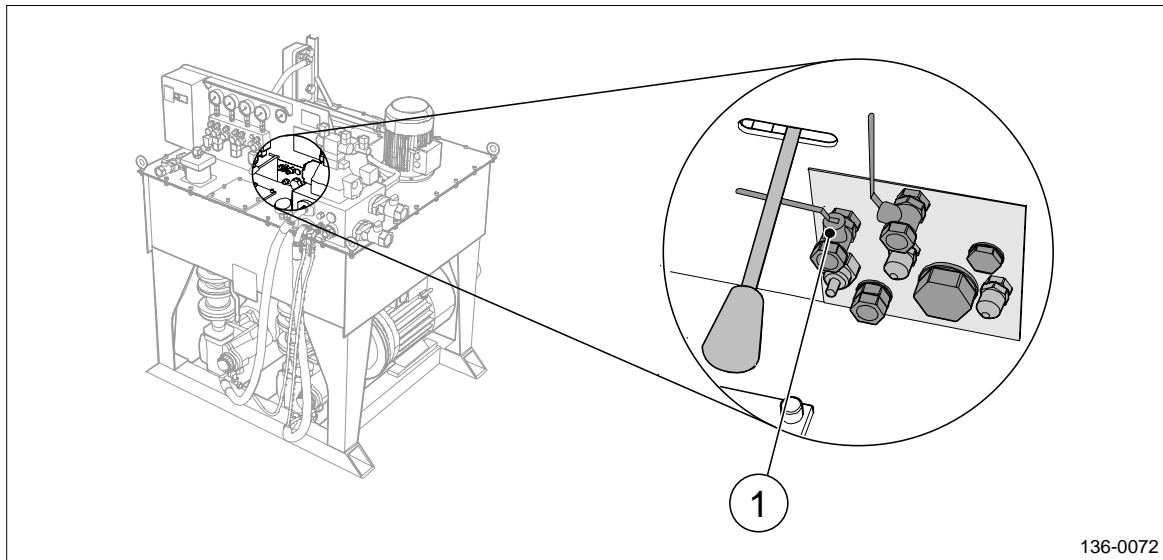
The emergency operating control panel on the hydraulic power pack unit.
